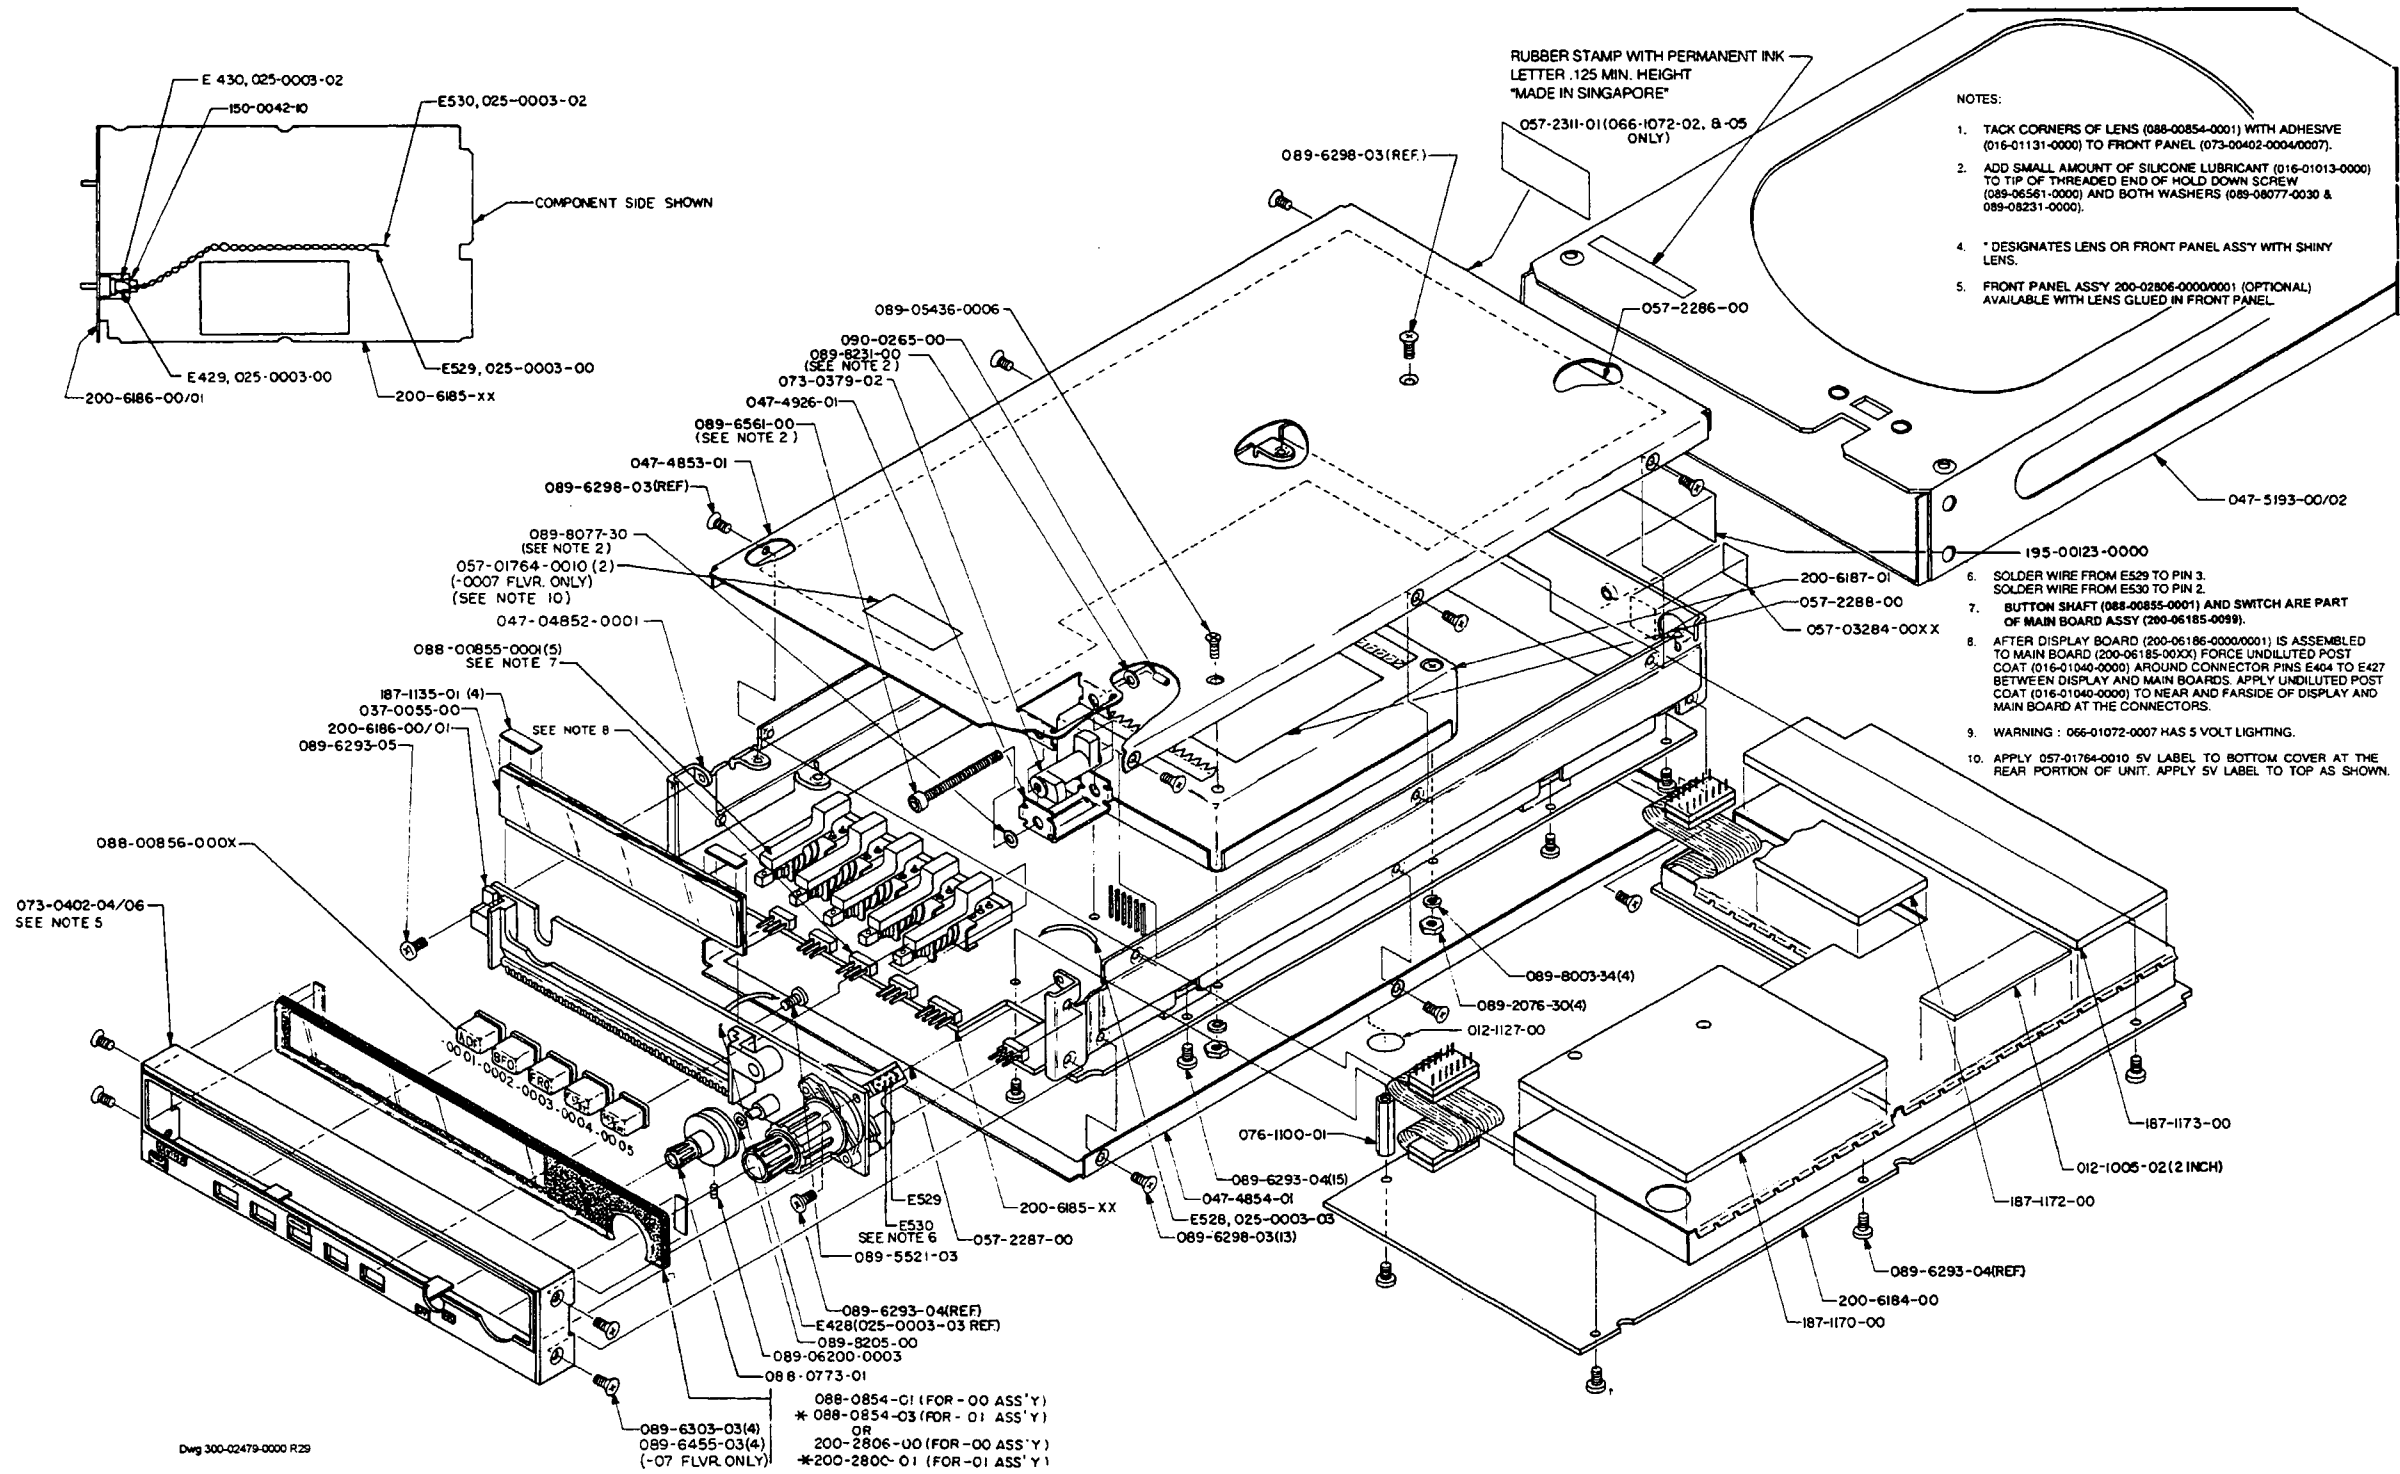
KR 87 FINAL ASSEMBLY
